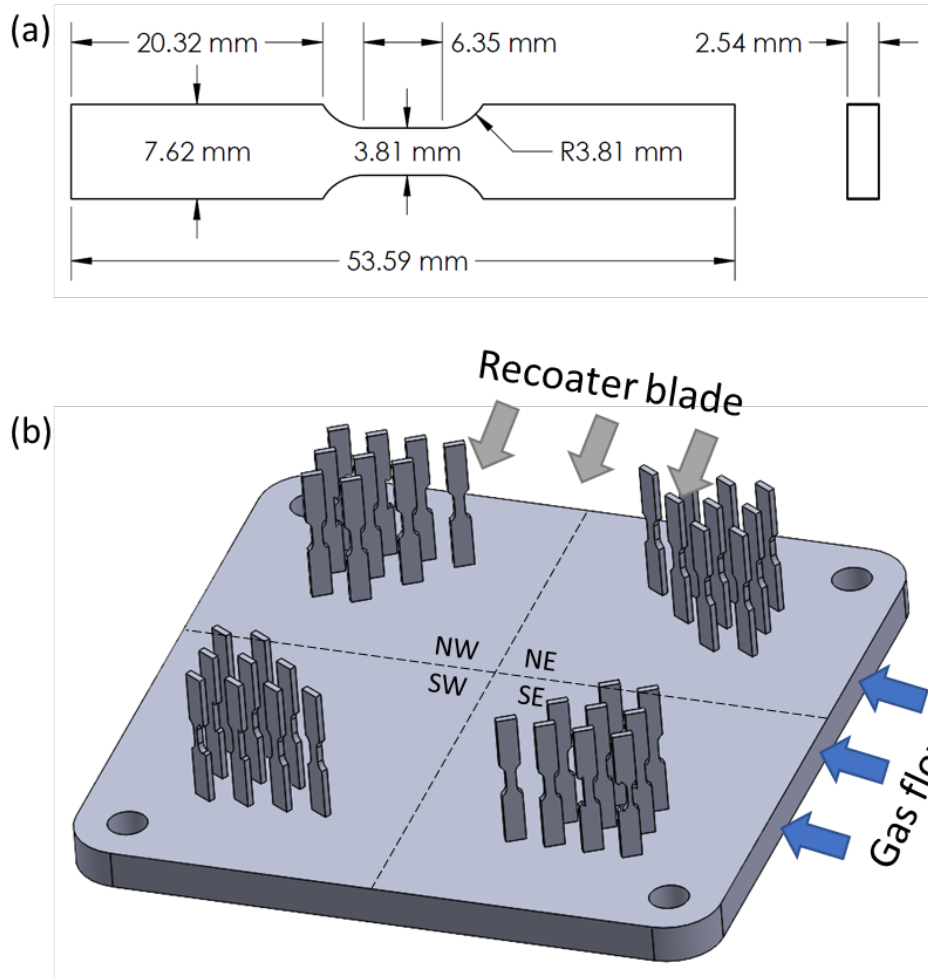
(a) Schematic of net-shape 316 L SS specimens with dimensions, (b) schematic of the build platform including the indications of 4 quadrants and directions of shielding gas flow and recoating process.
